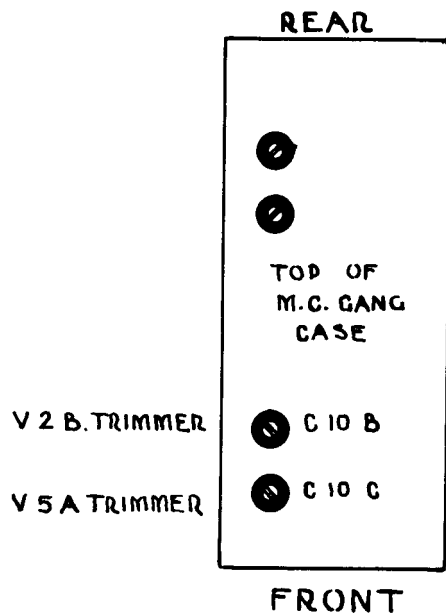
LOCATION OF H.F. DRIVE TRIMMERS
